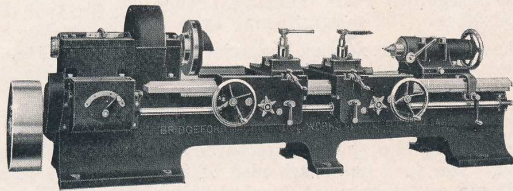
BETTS-BRIDGEFORD HEAVY DUTY END DRIVE AXLE LATHE, TYPE A1300
